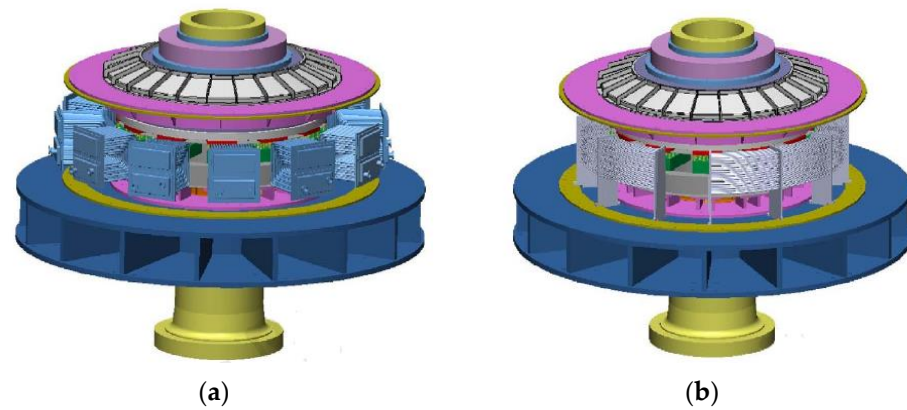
Model of lubricating oil internal circulation cooling thrust bearing [114]. (a) Thrust bearing models with drawer-type oil cooler; (b) thrust bearing models with vertical-type oil cooler.
